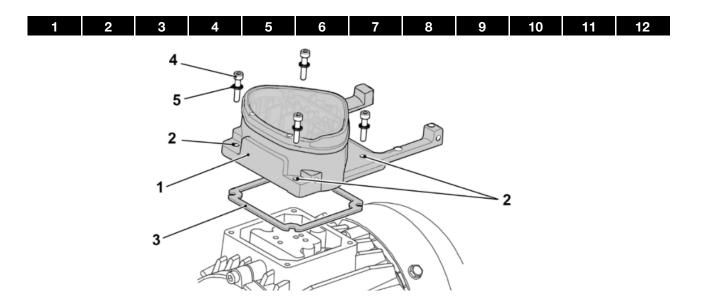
Assembly sequence: Connection box – adapter plate (sizes A - C)
